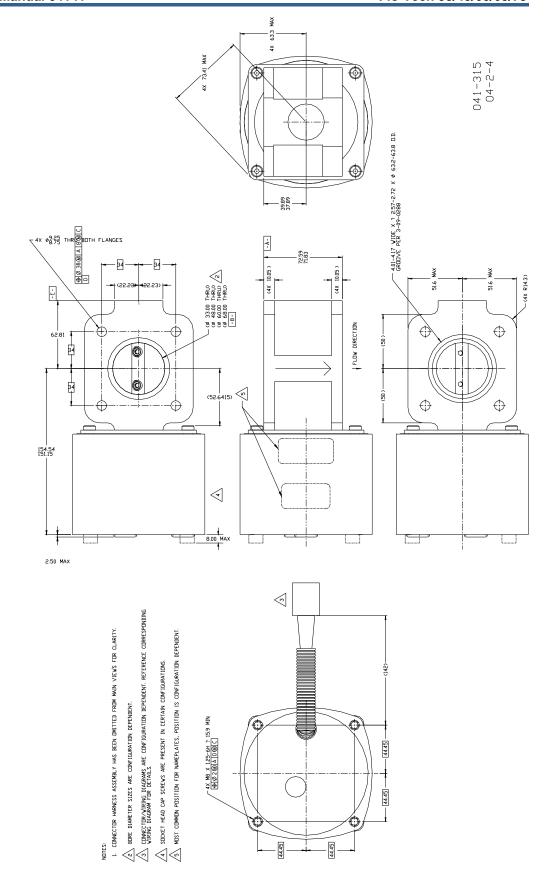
Flo-Tech Outline Drawing (O-ring Flange Mounting)
